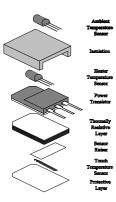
Exploded view of manipulator's thermal sensor
